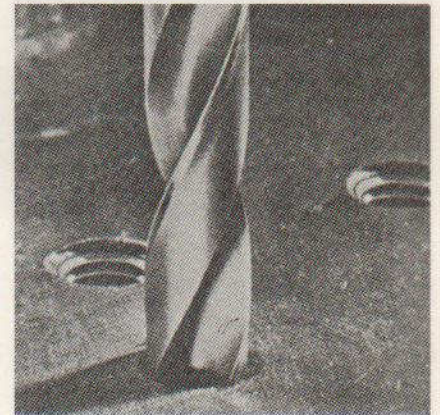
First step in repairing damaged threads is to drill out old threads using exact size drill recommended in instructions provided with thread repair kit. Drill all the way through an open hole or all the way to bottom of blind hole, making sure hole is straight and that centerline of hole is not moved in drilling process. (Series of photos provided by Heli-Coil Corp., Danbury, Conn.)
